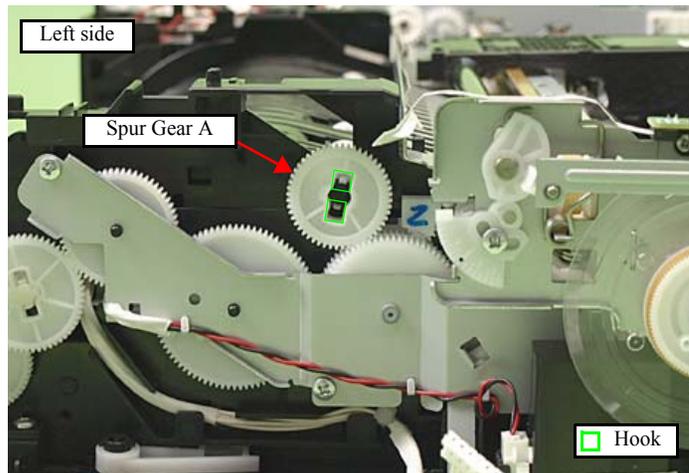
Removing the Lower ASF Paper Guide Assy (1)
